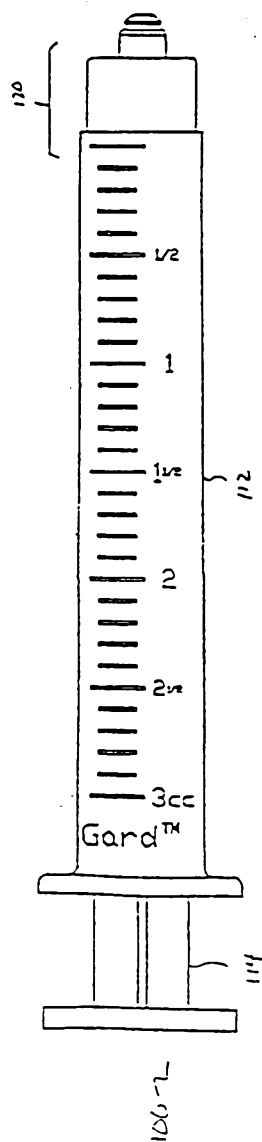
SIDE VIEW - PLUNGER IN LOCKED POSITION
